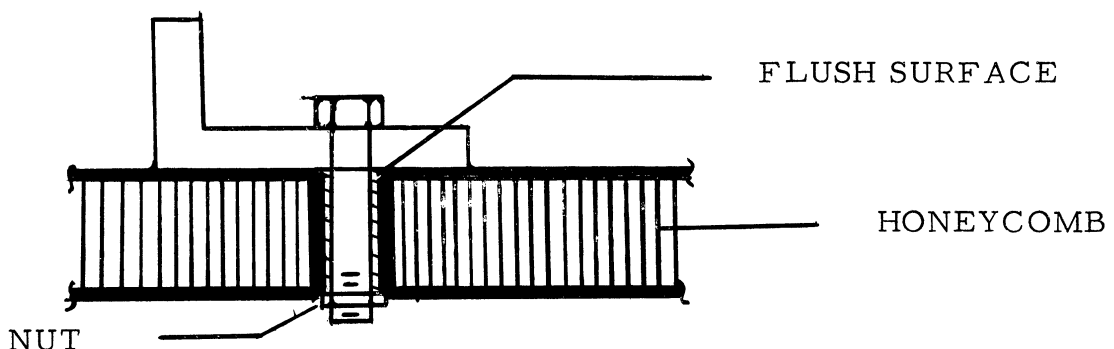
HONEYCOMB FASTENING TECHNIQUE
